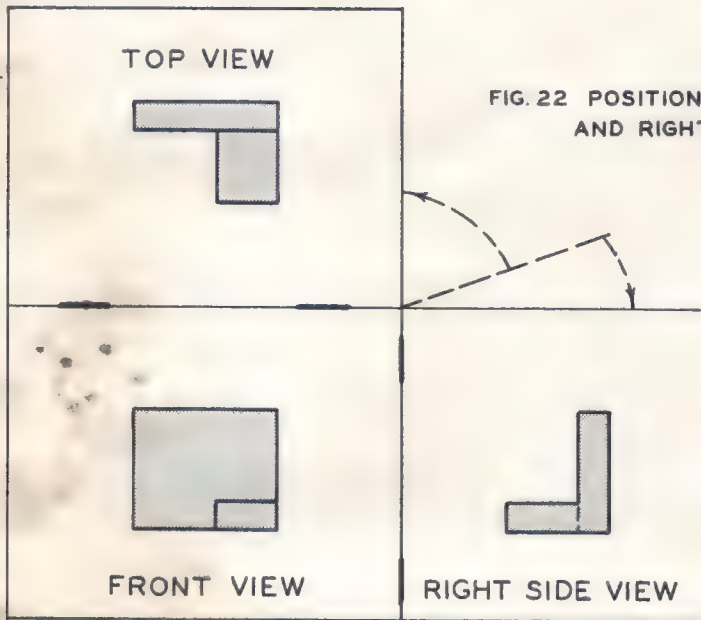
POSITIONS OF FRONT, TOP AND RIGHT SIDE VIEWS
